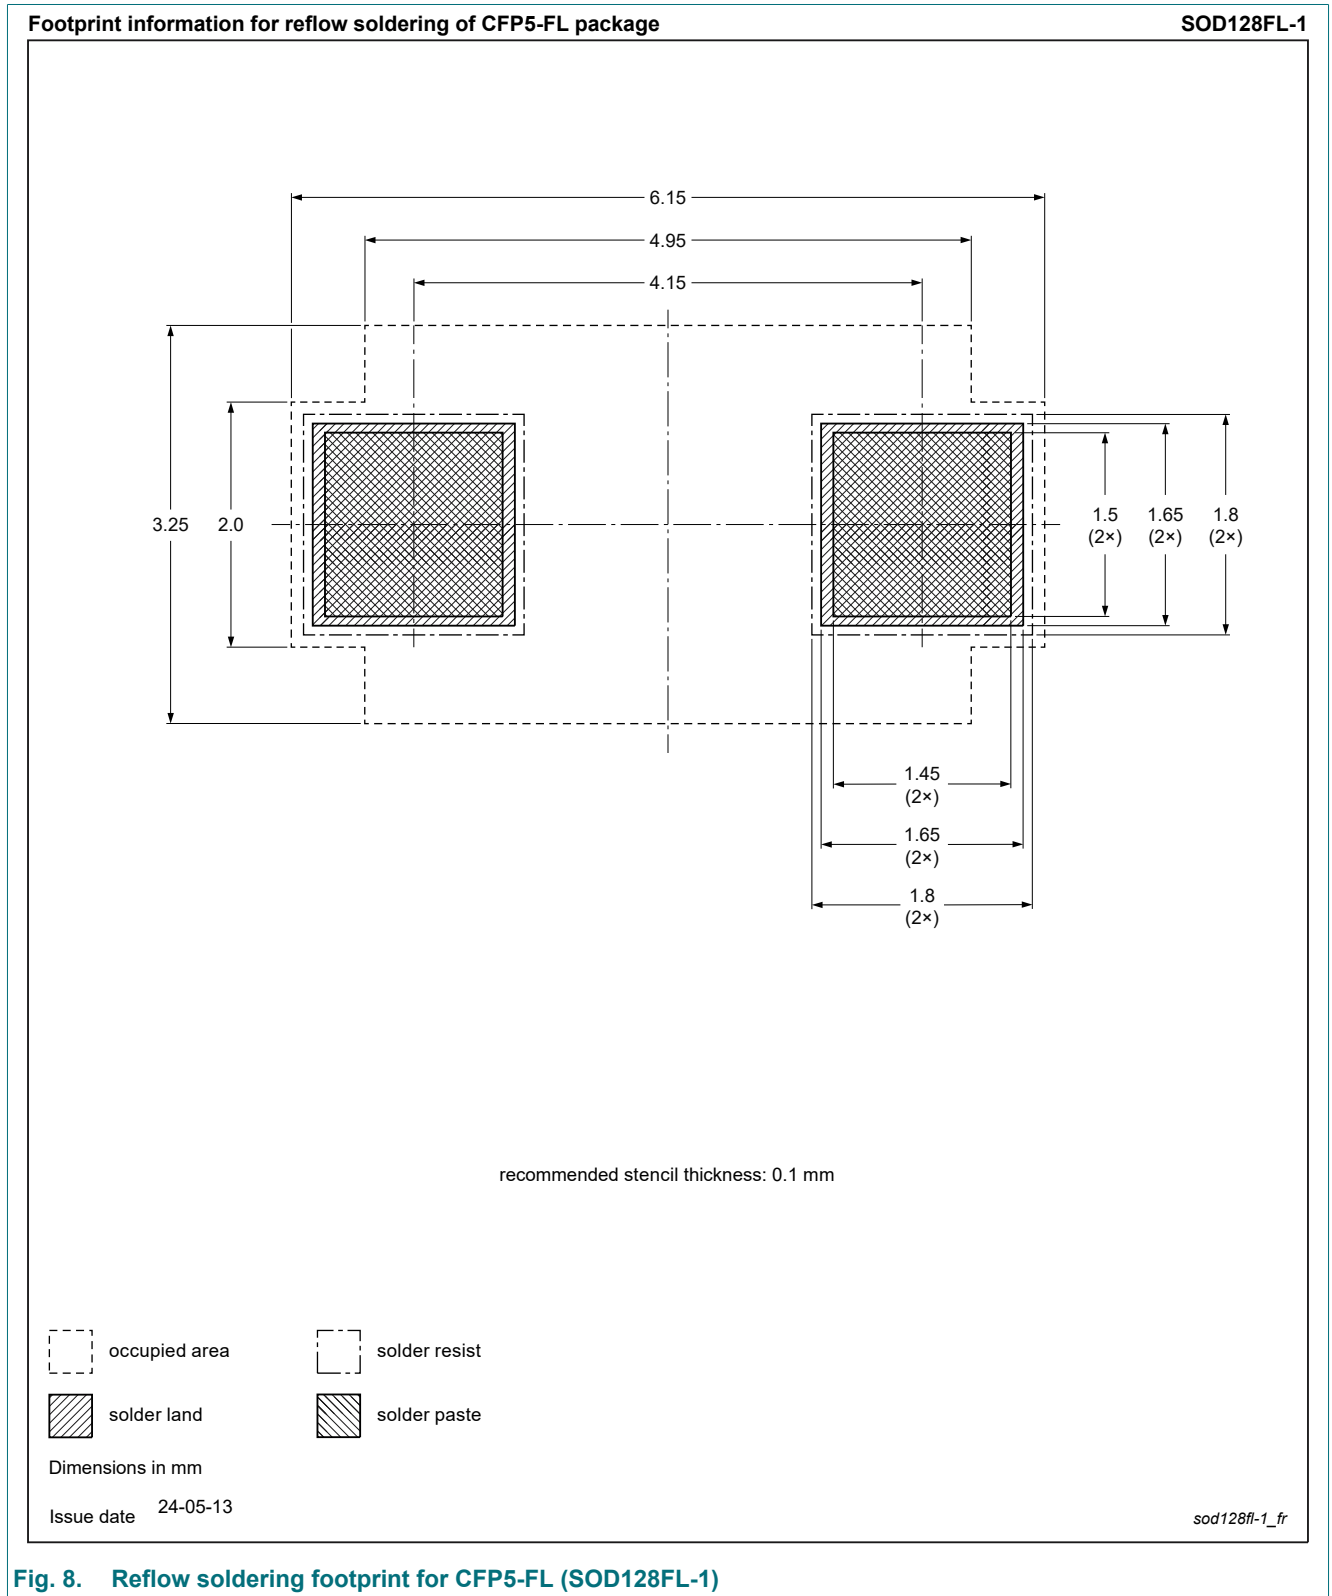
Reflow soldering footprint for CFP5-FL (SOD128FL-1)
